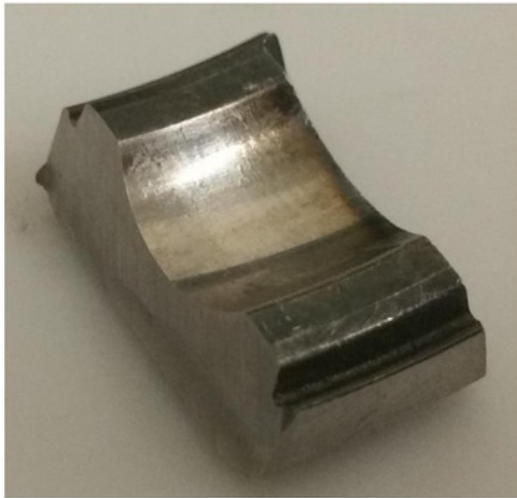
After first stage of cutting, this piece is cut in half horizontally
